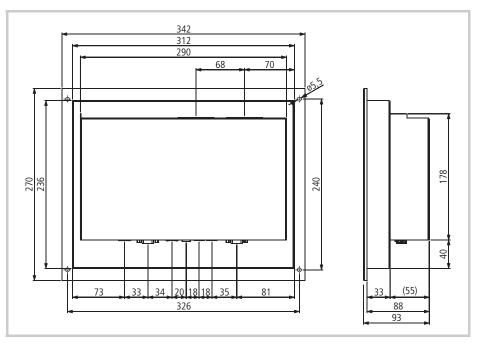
Mechanical dimensions of the 10.4" devices with 4-hole front in mm
